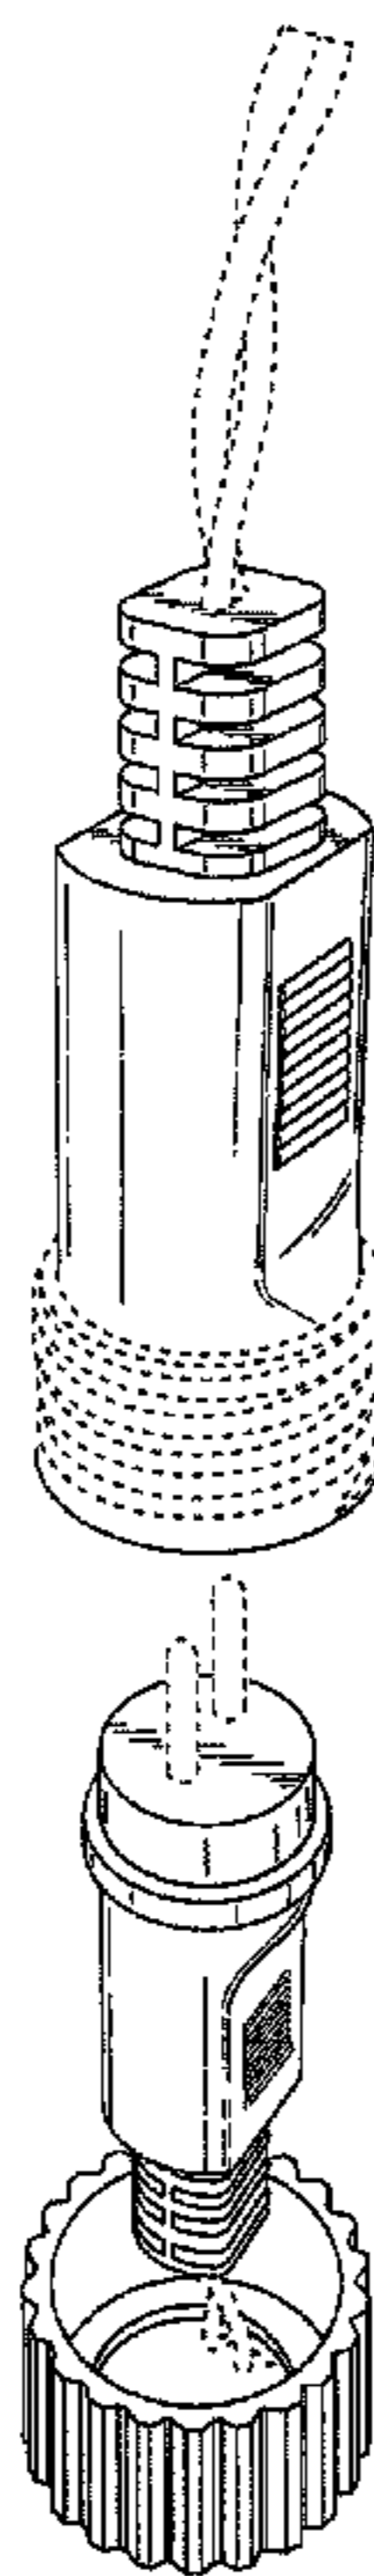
is a top plan view of the string light connector shown in FIG. 1 in a disconnected condition, the bottom plan view being a mirror image of the top plan view;
